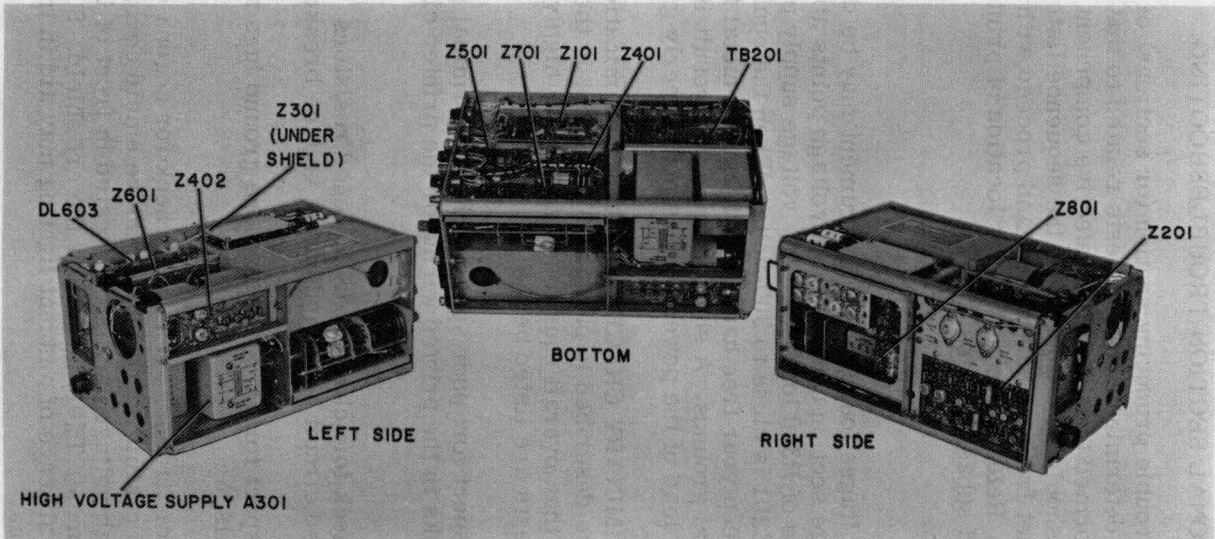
Location of Printed Circuit Boards and Subassemblies
